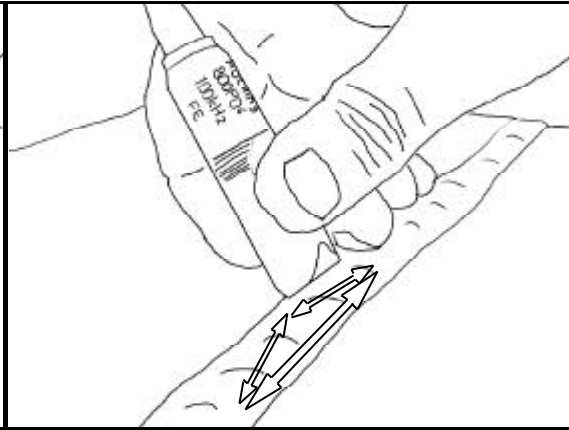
B - Scan of Weld Cap (single weld pass)
